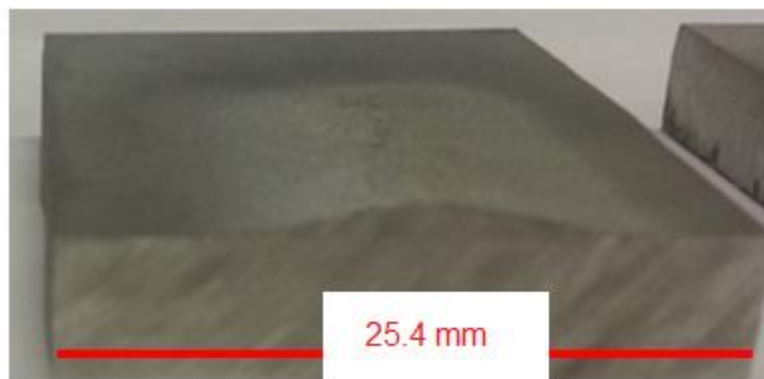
Aluminum 7075 coating on aluminum 7075-T6 substrate using the ceramic nozzle
